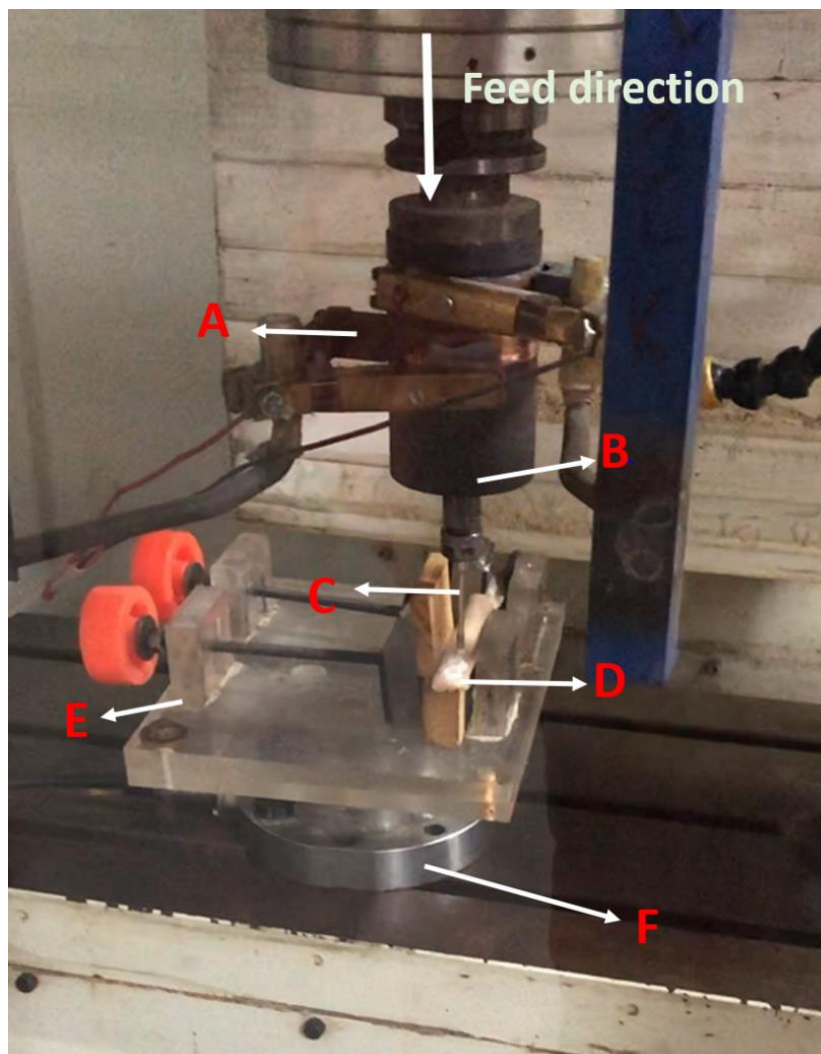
Experimental setups of UBD: (a) carbon brushes; (b) transducer; (c) hollow drill bit; (D) bone sample; (E) fixture; (F) dynamometer
